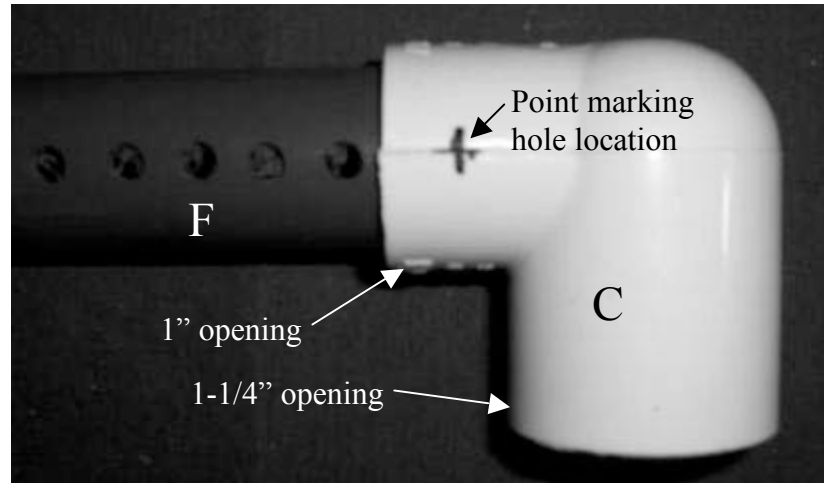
Step 14 - Marking the Hole to be Drilled.
